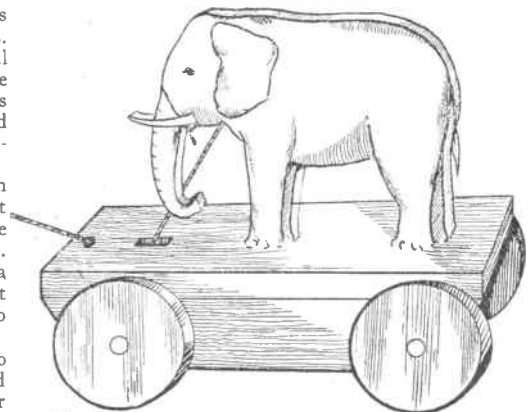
, without the crank. Remove one side of the chassis, and fit the axles in place. Refix the side again and glue the wheels on. Now to set the mechanism.
